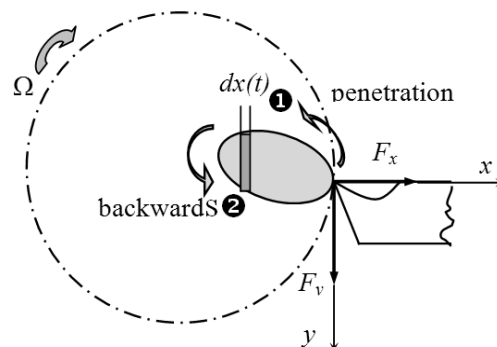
Relative displacement of the cutting tool tip with respect to the workpiece.
